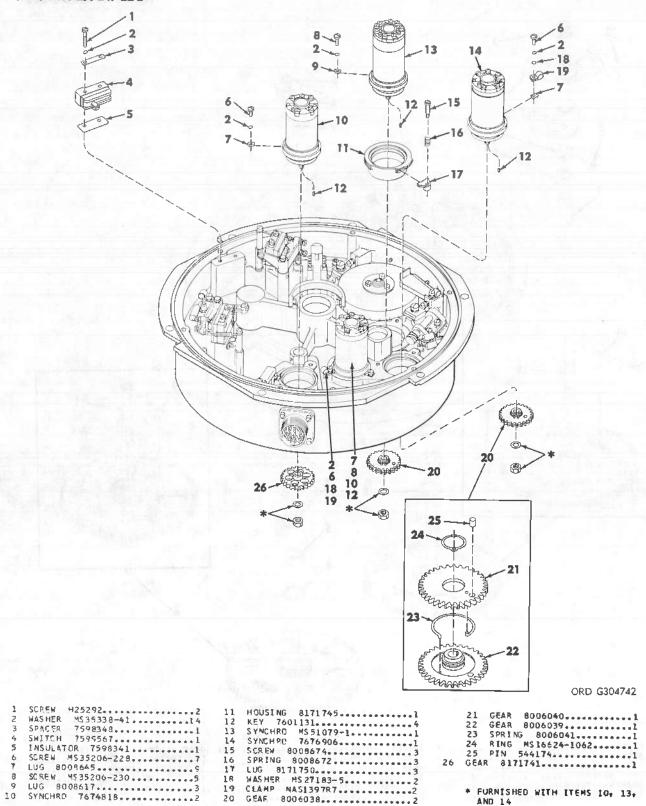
TRANSMITTER, POSITION, GUIDED MISSILE /9007946/-PARTIAL EXPLODED VIEW
